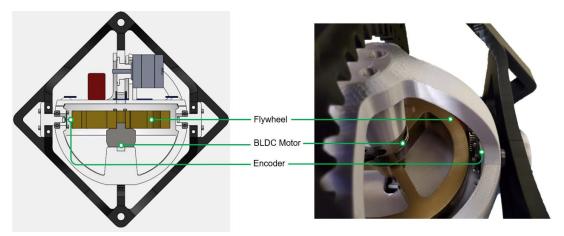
Lower half of the gyroscope assembly containing the flywheel and encoder
